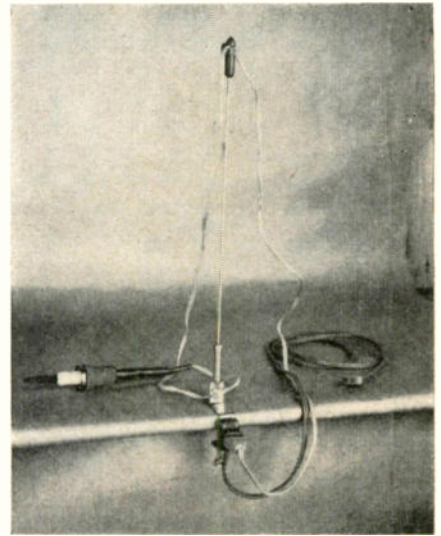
Cord holder prevents burning and tangling with components on work bench.
